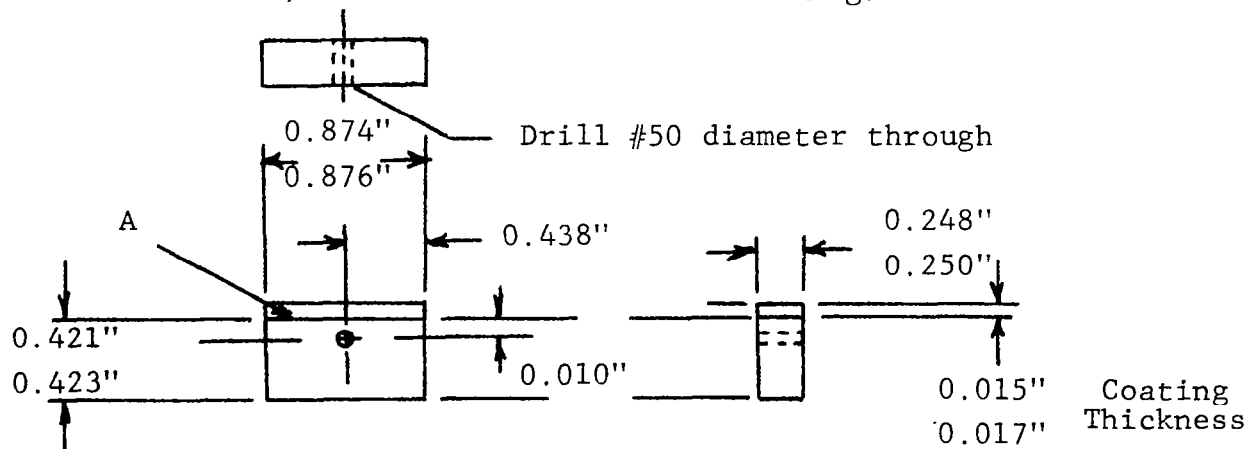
Rub Block Specimen for NASA Wear Test Machine.
